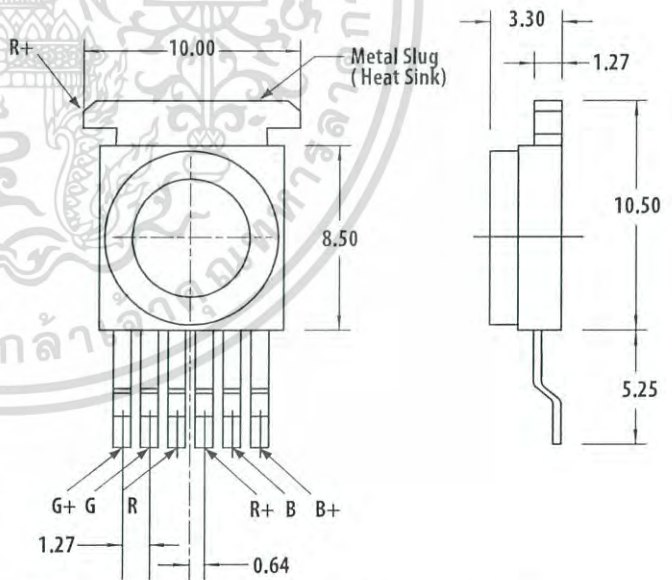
Outline drawing of the 3-in-1 RGB Moonstone LED package (ASMT-MT00), showing dimensions.
